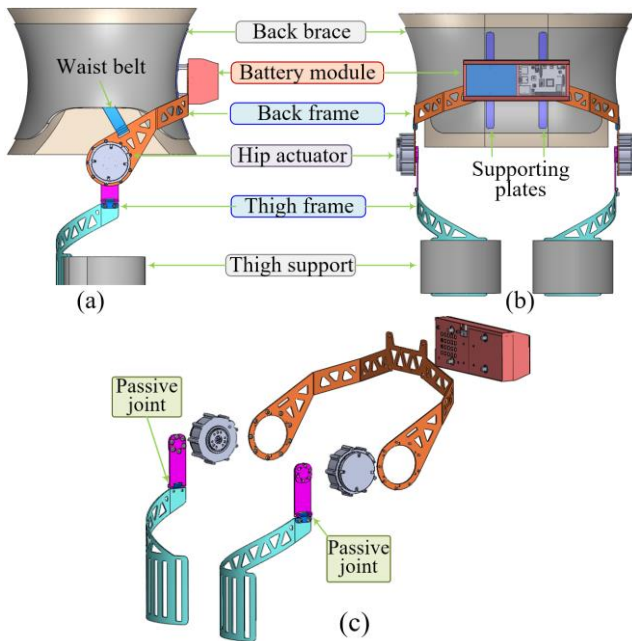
Illustrations of the proposed hip exoskeleton (a) Side view (b) Back view (c) Exploded view
